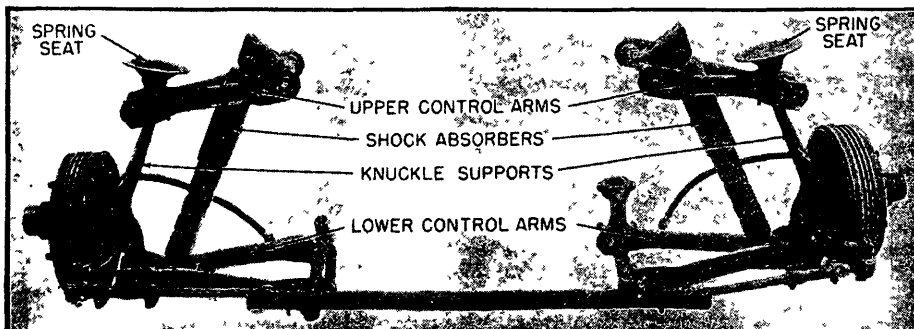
1950-52 Rambler front suspension. Coil springs (not shown) act directly at steering knuckle supports. Control arms serve only for alignment purposes. Front suspension cross member is eliminated—suspension units are connected directly to body structure. Design typical of 1952 Statman and Ambassador
